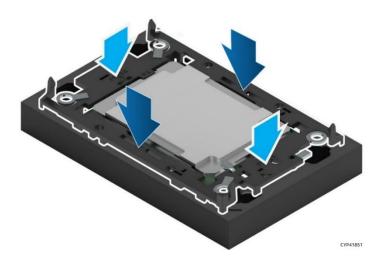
Installing Processor Carrier Clip onto Processor – Part 2
